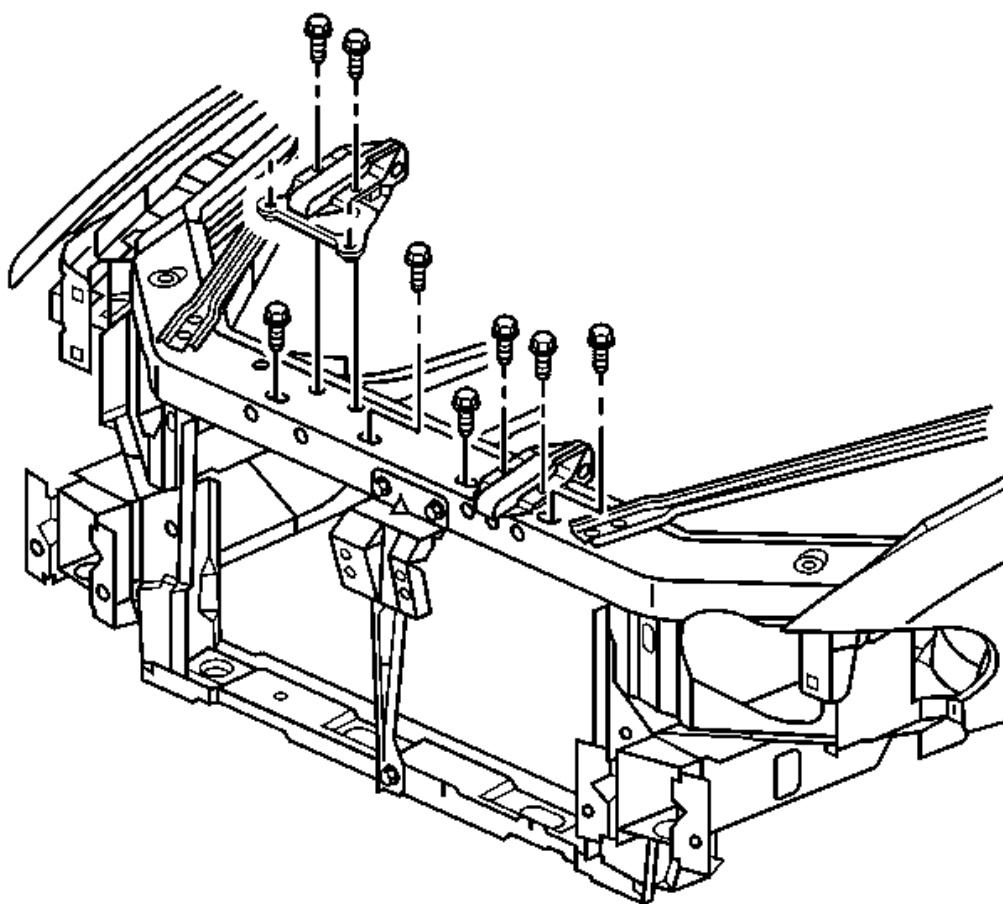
Removing Engine Mount Strut Bracket - Upper Radiator Support
